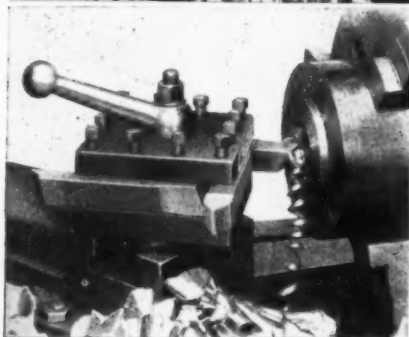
Same tool shown in photos No. 1 and No. 2 being used for inside chamfer.
